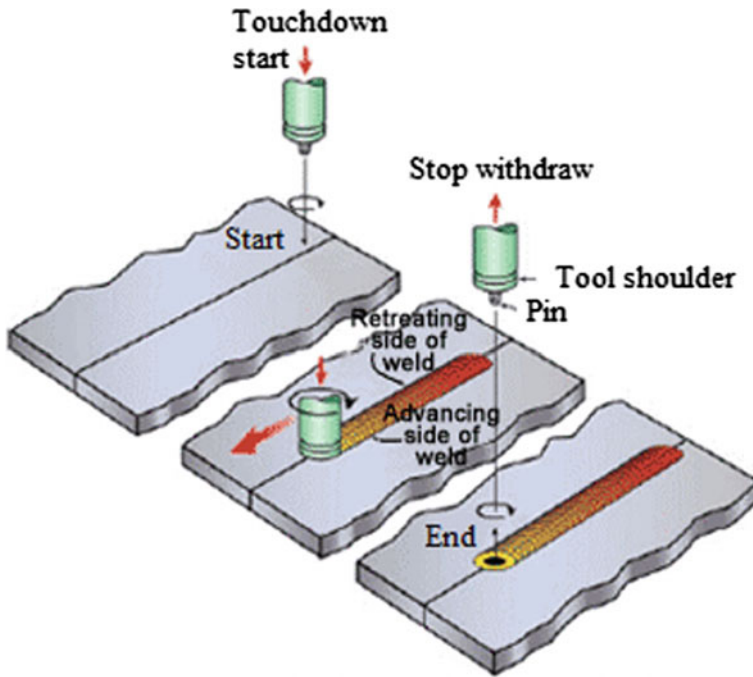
Schematic of Friction Stir Welding [4]
